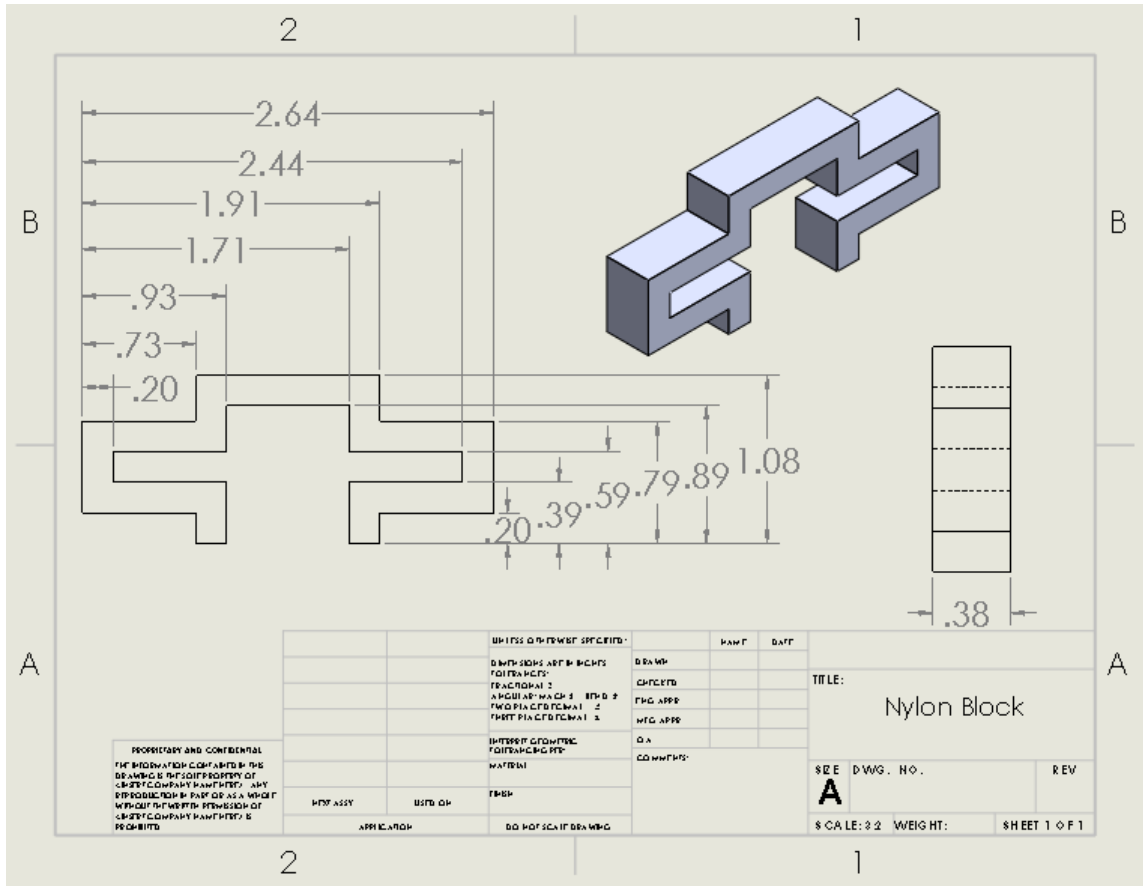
Drawing of Full Scale Nylon Guide.
